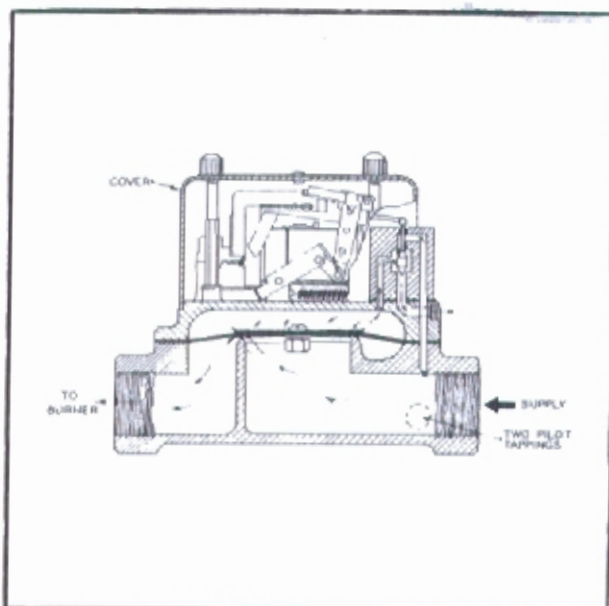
Schematic Section through V148 or V448 Diaphragm Valves. V149 similar except for Angle Offset Valve Body.
